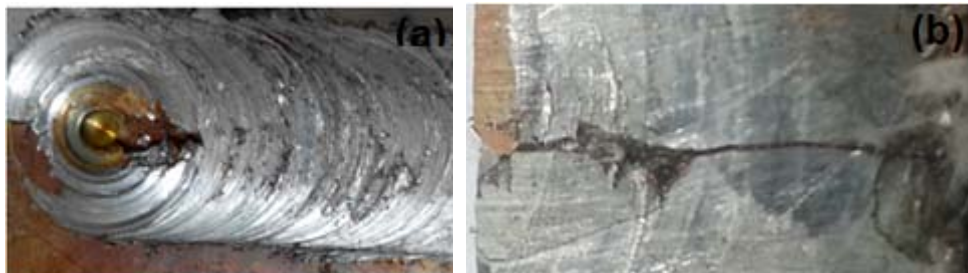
FSW of Al-Cu system arranged on advancing side as (a) Al and (b) Cu
